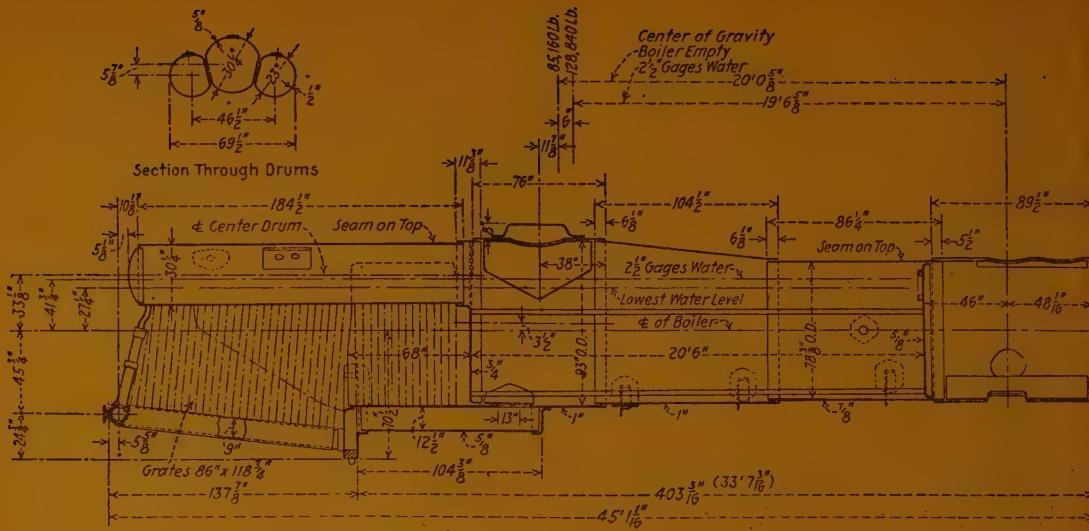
Sectional elevation of the McClellon firebox and boiler.
